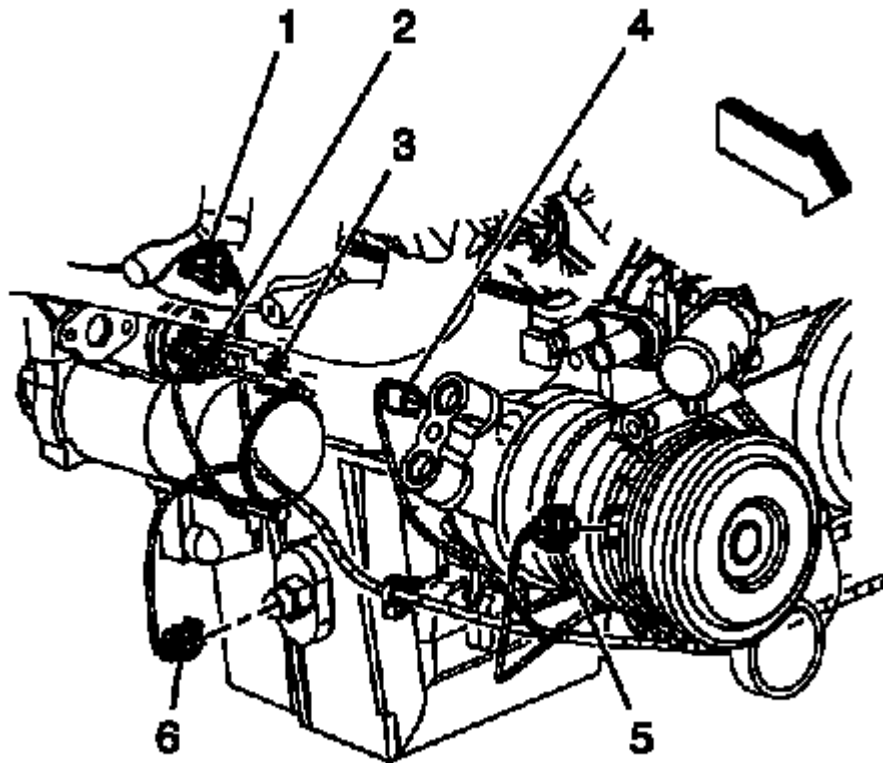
Identifying Electrical Connector (Right Side Of Engine)
